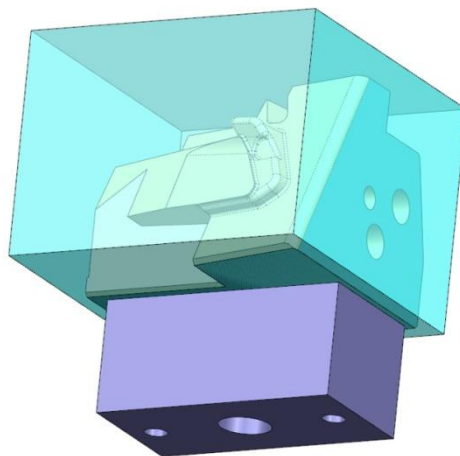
Technological scheme of installation and fixing of the blank part "liner" to "technological cube"
